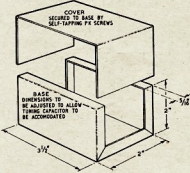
General construction of oscillator chassis/box assembly. To be secured to the main chassis by PK screws. Clearance hole to be cut in chassis to allow passage of leads from oscillator. Ventilation holes 1/4 in. diameter to be drilled in main chassis directly under oscillator valve position. Material: 16 s.w.g. or 18 s.w.g. aluminium.
